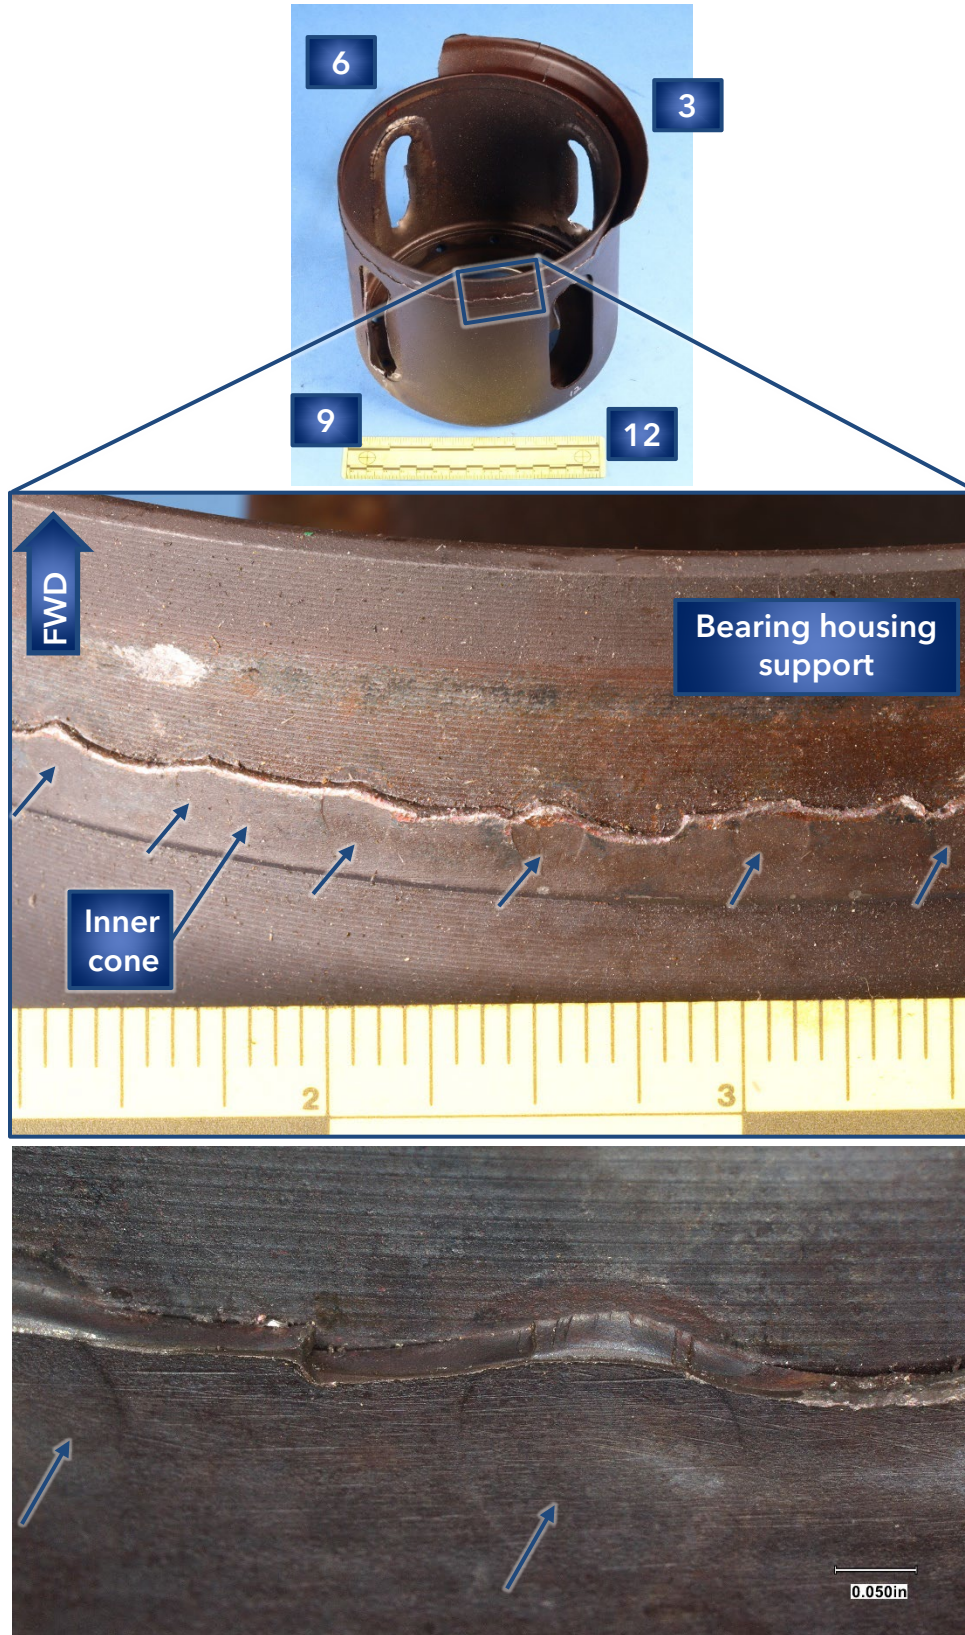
Views of the bearing housing support and inner struts after separating the inner cone from the support.
